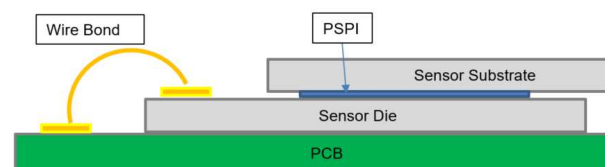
Schematic Drawing Bonded Sample on PCB with Wire Bond
